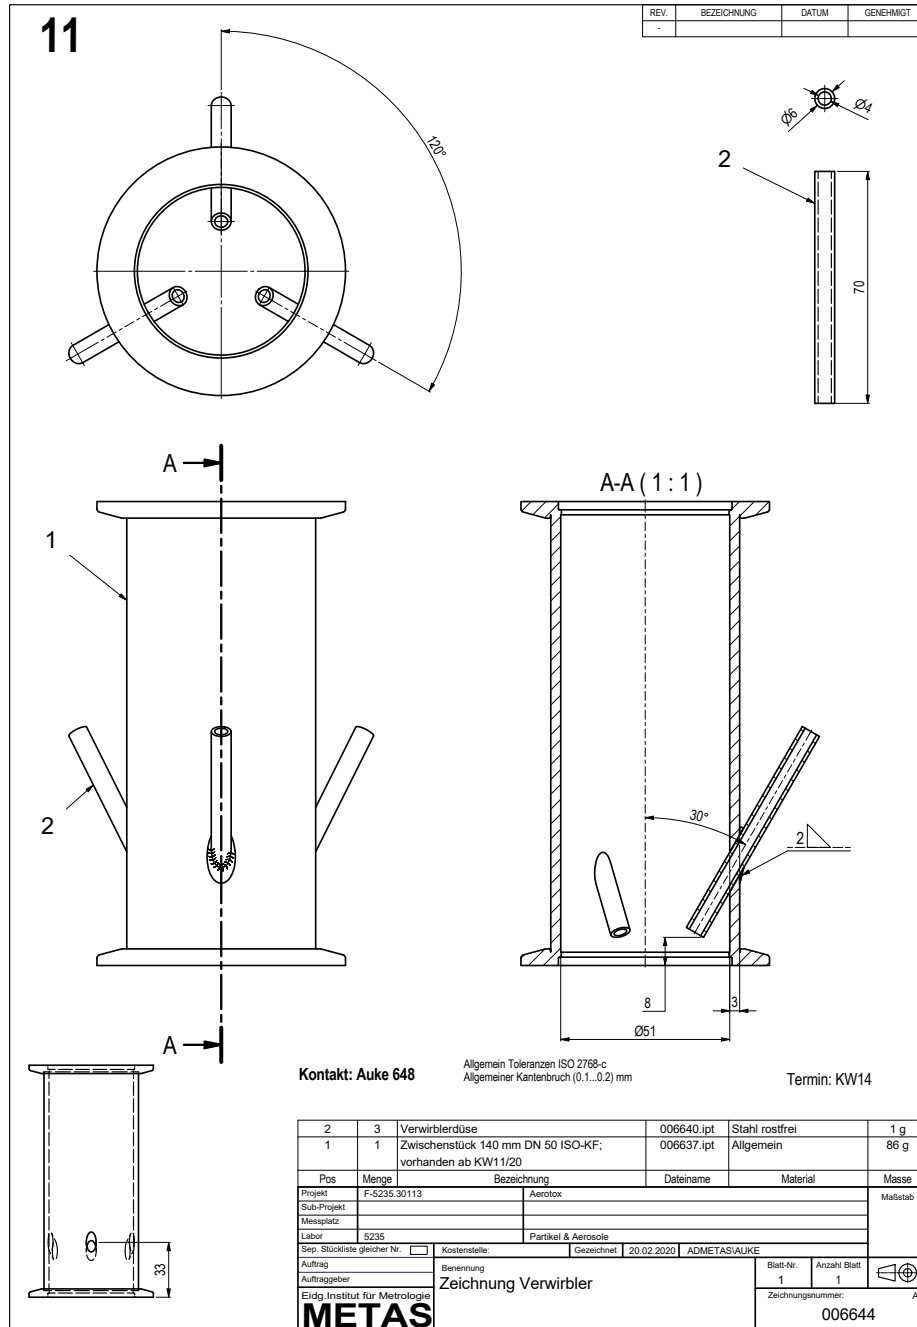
CAD drawing: top, frontal projection and longitudinal cross-section of the inlet pipe positioned on top of the mixing chamber
